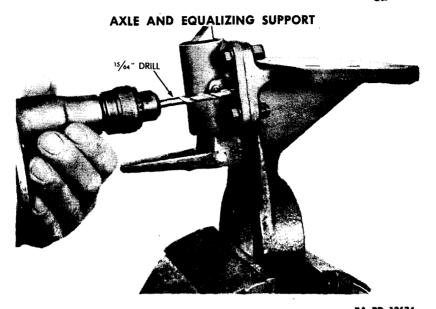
Drilling Dowel Pin Hole in Pintle Support Bracket
